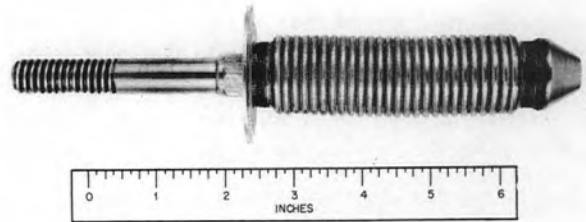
HRT Low-Pressure Control Valve Bellows, Plug, and Stem Assembly.
